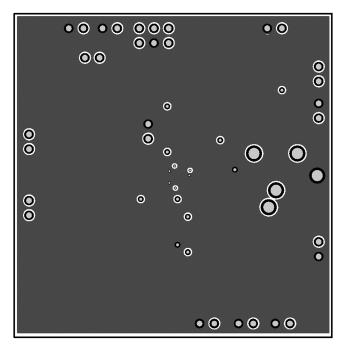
Recommended DSBGA PCB Layout: Bottom Layer
